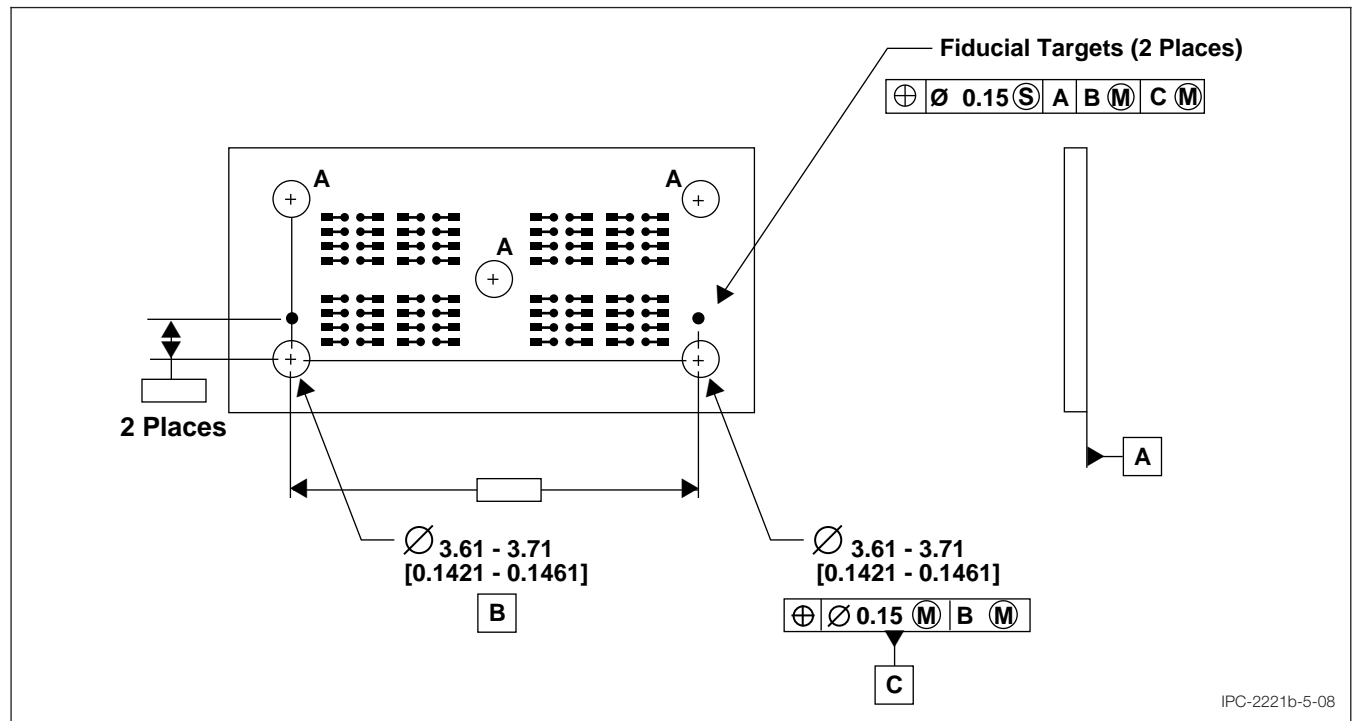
Example of a Pattern of Tooling/Mounting Holes, mm [in]
